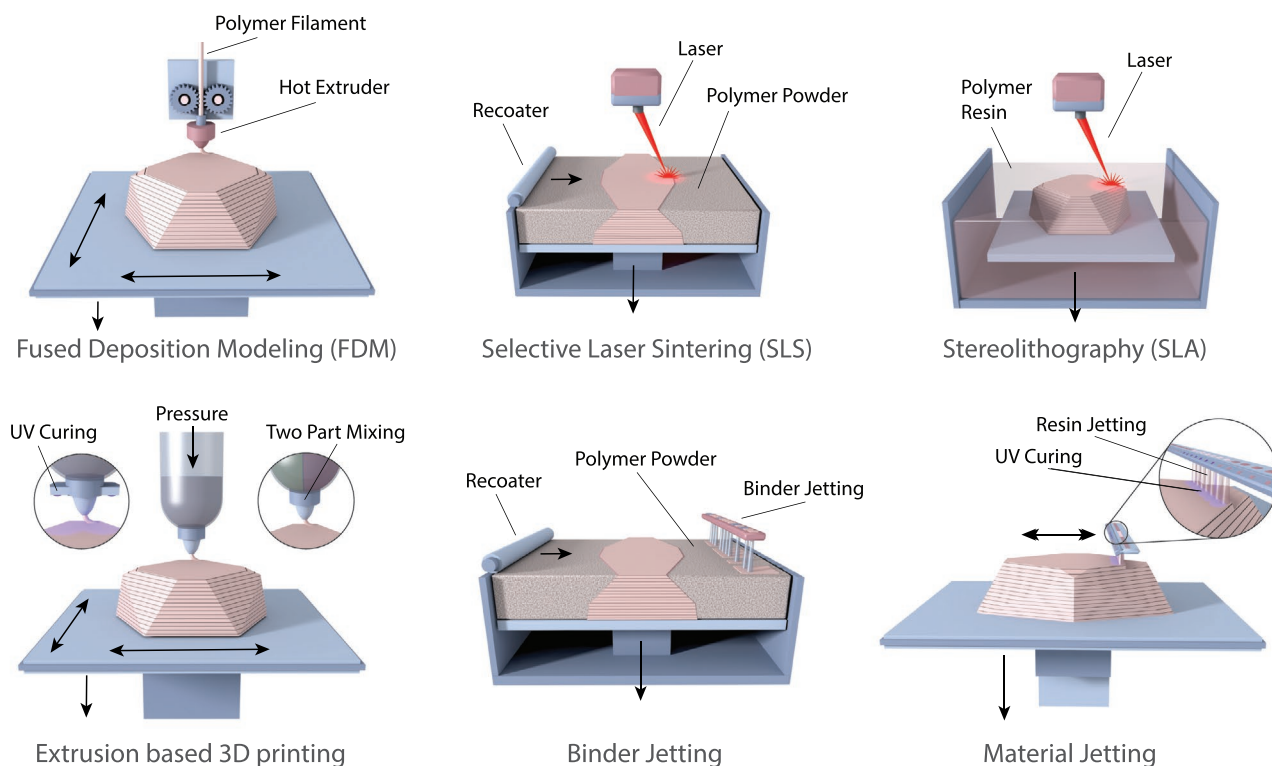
Schematics showing the most common polymer 3D printing technologies. All techniques build up the 3D object layer-by-layer. Fused deposition modeling (FDM) involves drawing a polymer filament through a heated extruder and onto the print bed which translates to produce a stack of object “slices.” Selective laser sintering (SLS) involves coating a layer of fine polymer powder on the top of the build area. A laser is then used to selectively sinter the powder in the desired pattern following which a new layer of powder is deposited and the process repeats. Stereolithography (SLA) uses a UV laser (or a 2D light pattern) to selectively polymerize a layer of polymer resin in a vat. After a layer is polymerized, it is lowered into the vat and the new layer polymerized. This process repeats to build up the object. Extrusion based 3D printing involves forcing a liquid polymer through a nozzle where it can polymerize. The 3D object is built up layer-by-layer as with FDM. In some applications, UV lamps are added to photocure the polymer upon extrusion, and two-part mixing can also be performed using a mixing or coaxial nozzle. Binder jetting operates similar to SLS, however, a binder material is selectively extruded onto the top layer of powder instead of sintering via a laser. Material jetting uses ‘ink-jet like’ print heads to selectively extrude polymer resin as the head passes over the build volume. The built layers are lowered and the process repeats to produce the 3D object, often with UV lamps to ensure curing. More advanced applications of this technique use thousands of very small nozzles that can each extrude different materials to create multimaterial 3D objects, or in some cases, enable the mixing of materials during fabrication to produce customized material properties.
